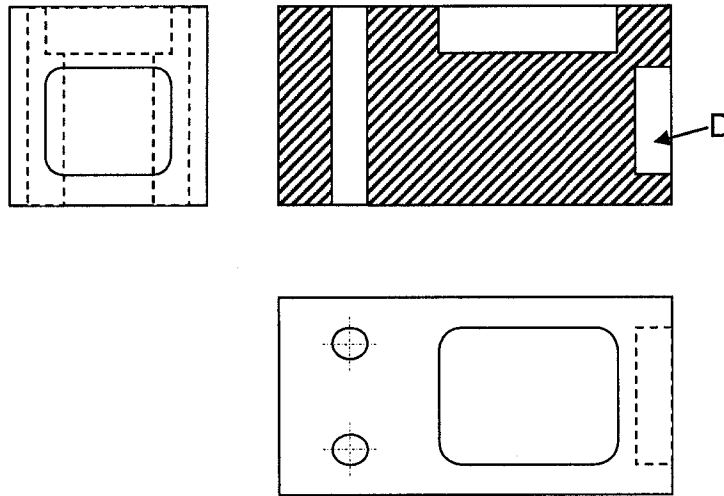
A part that Needs a 4-Axis Machine to Produce.
